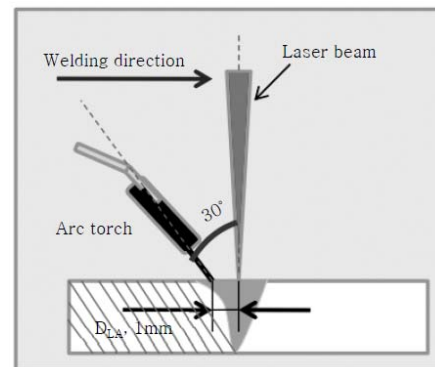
Schematic diagram of laser-arc hybrid welding
